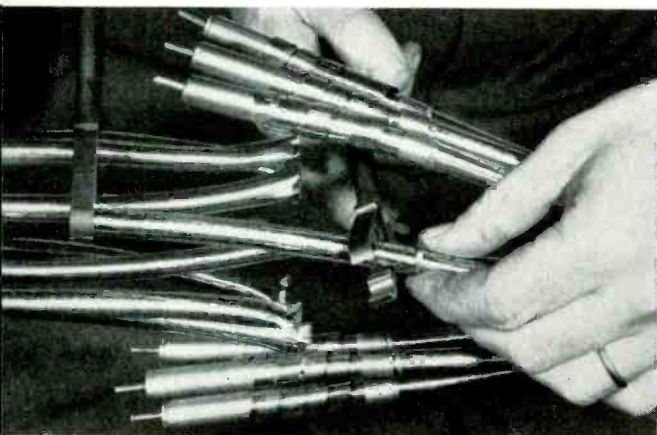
A copper ring is slipped over the coaxial and crimped to keep the steel tapes from unwinding
